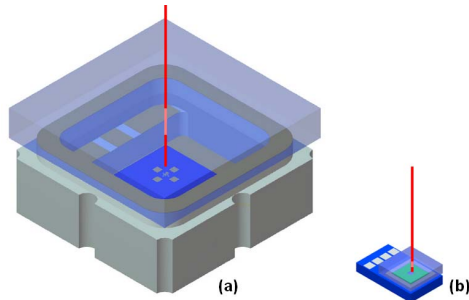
Laser trimming through (a) 3x3 ceramic package, and (b) wafer level package
